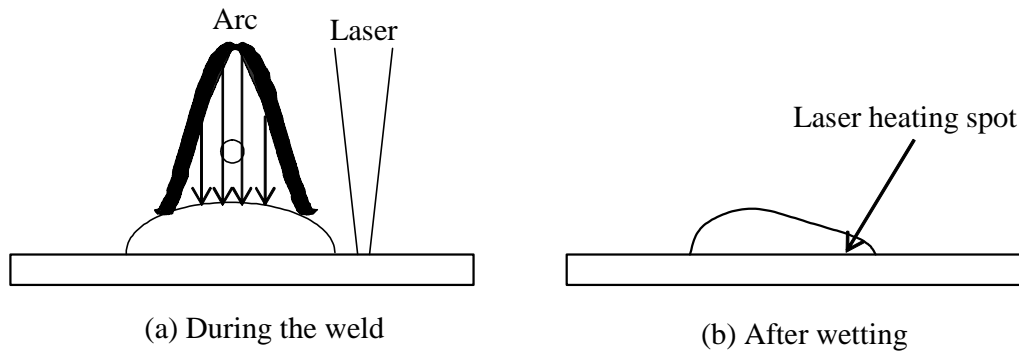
Hybrid Welding Process Concept for GMA Spot Welding
